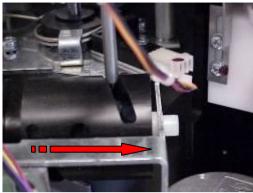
Horizontal movement bush slide towards the nylon bearing
